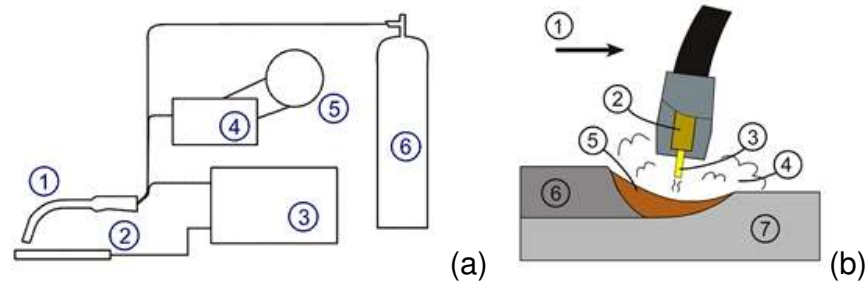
, (a): Conventional GMAW circuit diagram (1) Welding torch (2) Work piece (3) Power source (4) Wire feed unit (5) Electrode source (6) Shielding gas supply; (b): GMAW weld area (1) Direction of travel, (2) Contact tube, (3) Electrode, (4) Shielding gas, (5) Molten weld metal, (6) Solidified weld metal, (7) Work piece.
